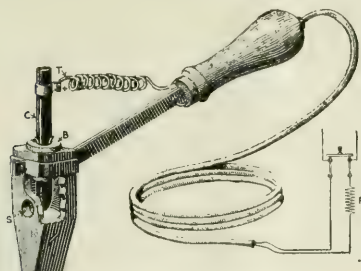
ELECTRIC-ARC SOLDERING IRON.
